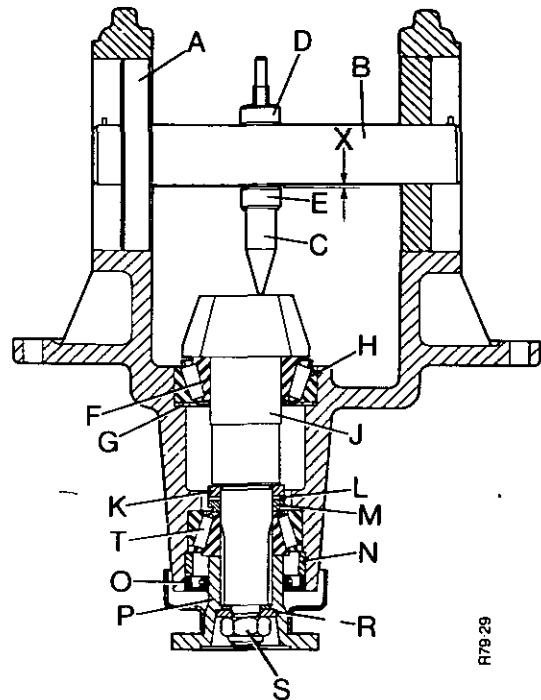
SETTING THE BEVEL PINION SHAFT POSITION
